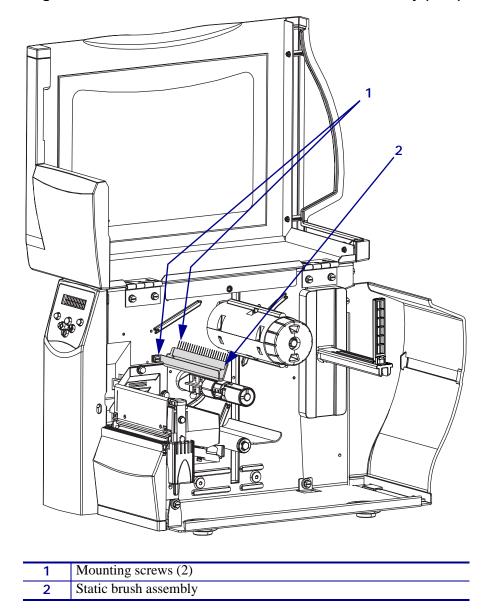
• Remove and Install the Static Brush Assembly (S4M)
